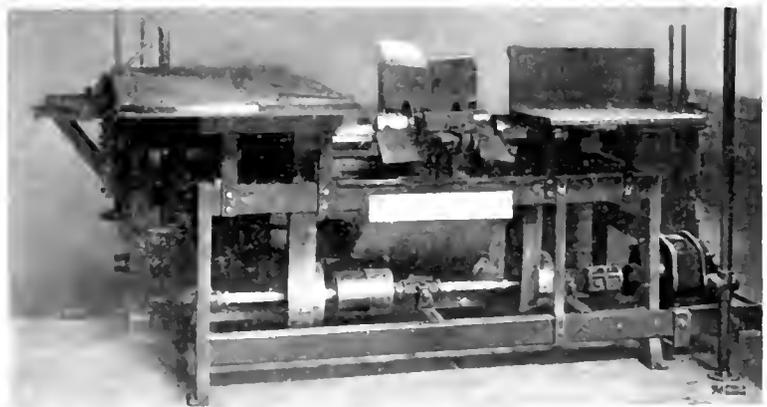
$7\frac{1}{2}$ H.P. Induction Moto: Direct Connected to Driving Shaft of Frame Machine, and Belt Connected to a Four Spindle Dowel Boring Machine
